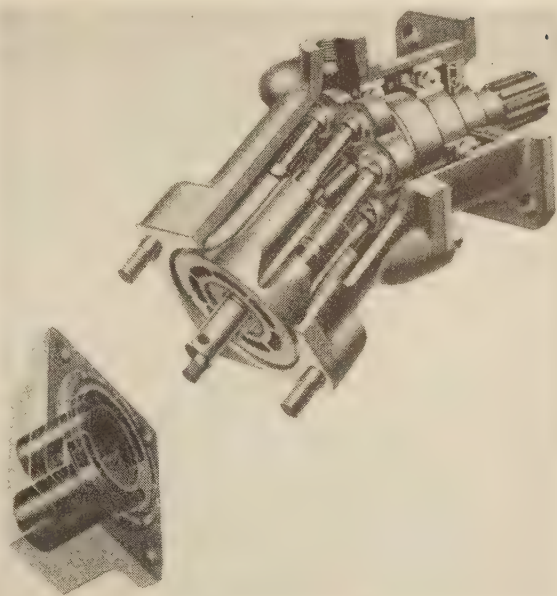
VALVE PORTING IN CYLINDER BLOCK AND VALVE PLATES OF CONSTANT-DELIVERY AXIAL-PISTON PUMP
